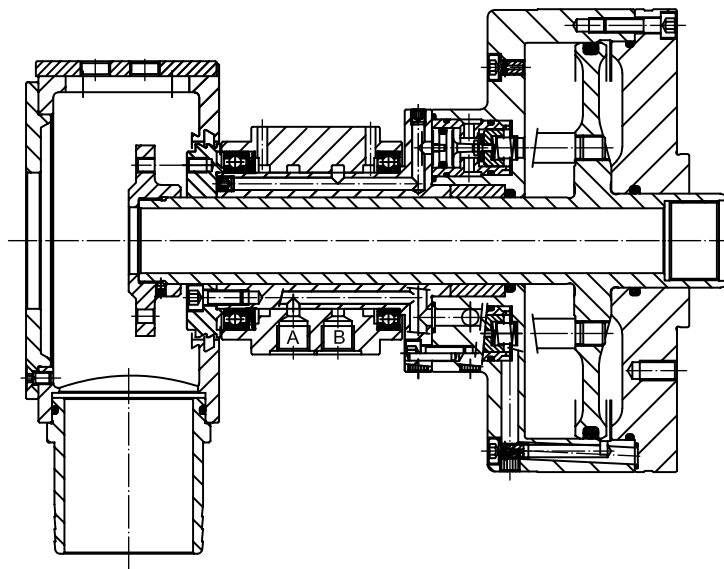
Through-hole cylinder (pneumatic cylinder)
